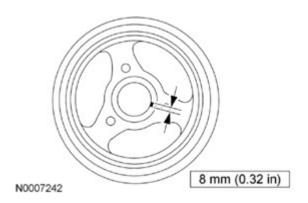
Identifying Crankshaft Pulley Sealant Applying Area On Woodruff Key Slot Courtesy of FORD MOTOR CO.
